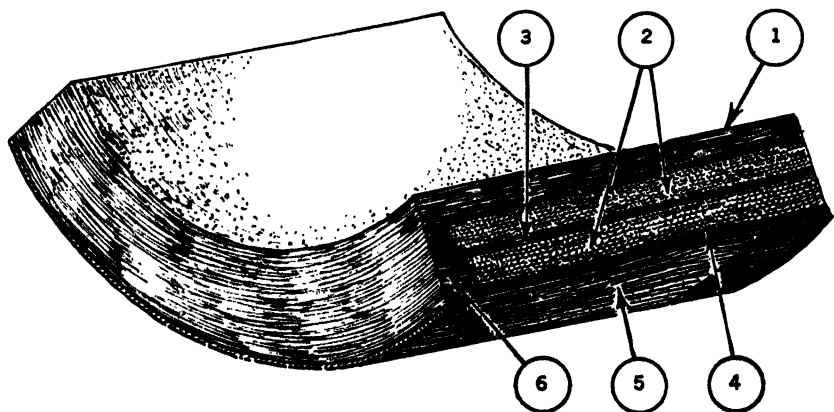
Section of Armorite Dredging Sleeve Showing Construction:
